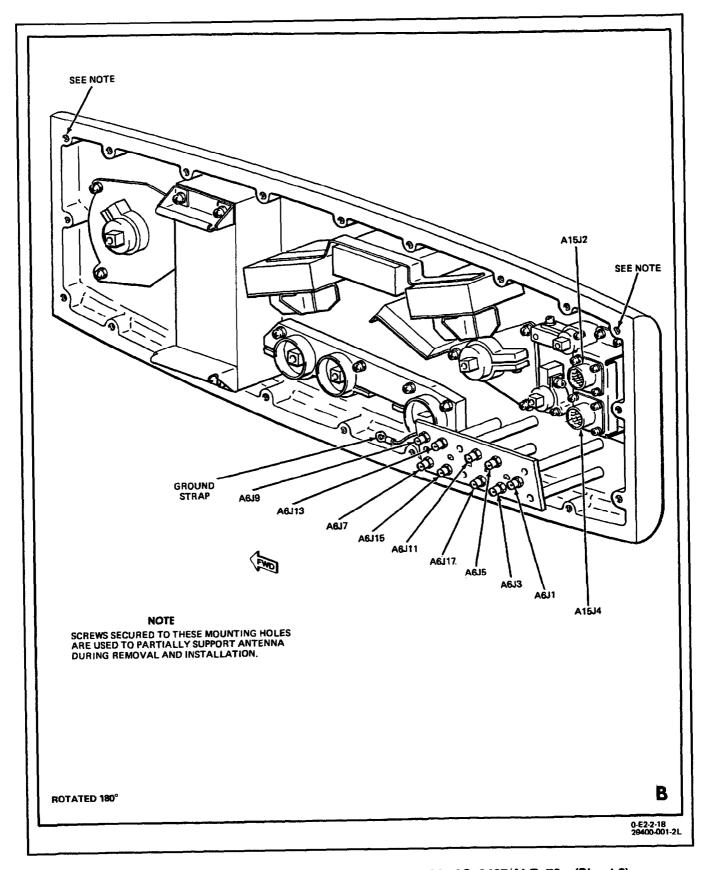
Removal and Installation of Antenna Assembly AS-3497/ALR-73 (Sheet 2)
